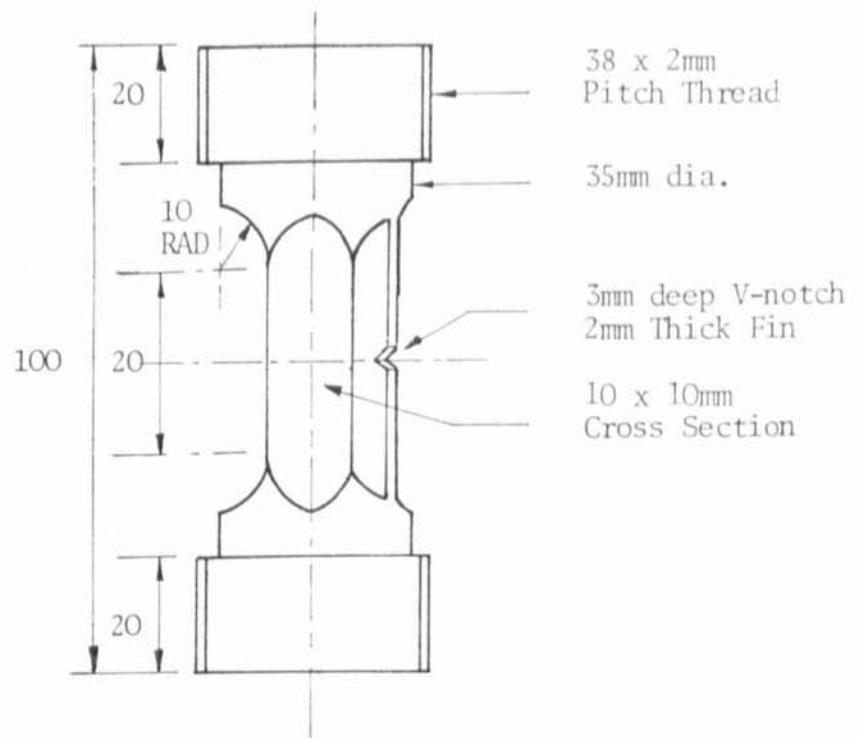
Corner-Crack Specimen Design for Short Cracks (mm).
